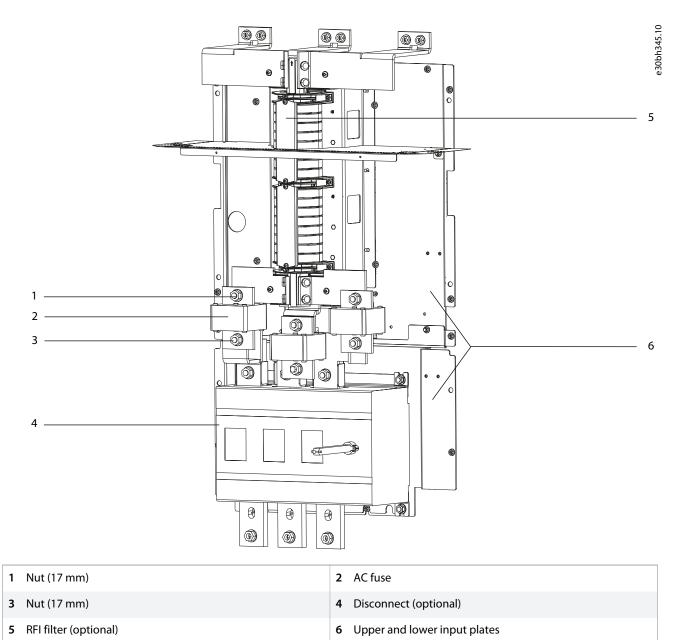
AC Fuse Removal in E1h–E4h Drives
